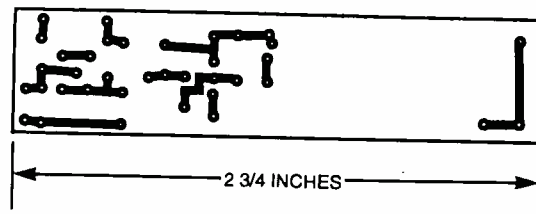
The majority of the electronic components for the Saber were assembled on a small printed-circuit board, measuring 2³/₄ by 5/8 inches. A full-size template of the printed-circuit foil pattern is shown here for those who prefer to "roll their own."
